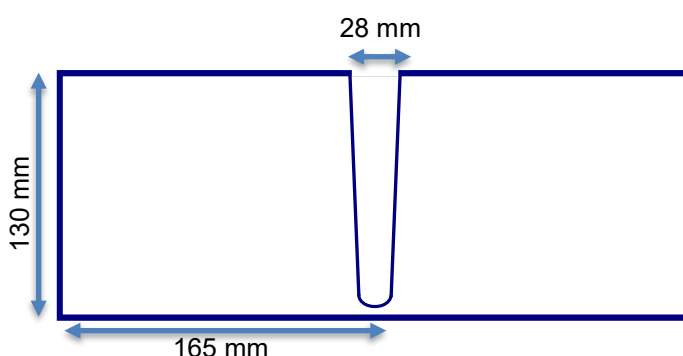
Layout for the 130 mm NUMMAN weld, plates have full depth of 575 mm.
